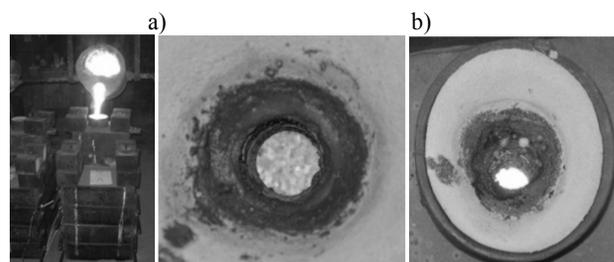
Pouring trials, a) mold with filter, b) damaged filter
